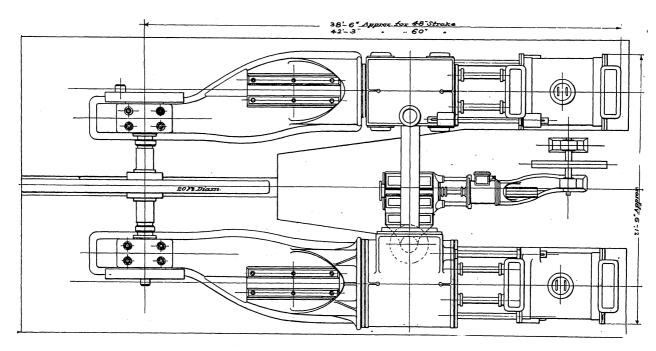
Plan of Cross Compound Bessemer Blowing Engine.
